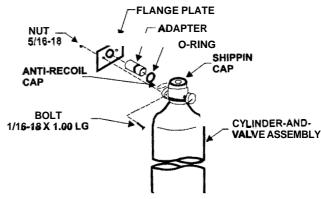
Discharge Adapter Kit Installation (PIN 844908)
